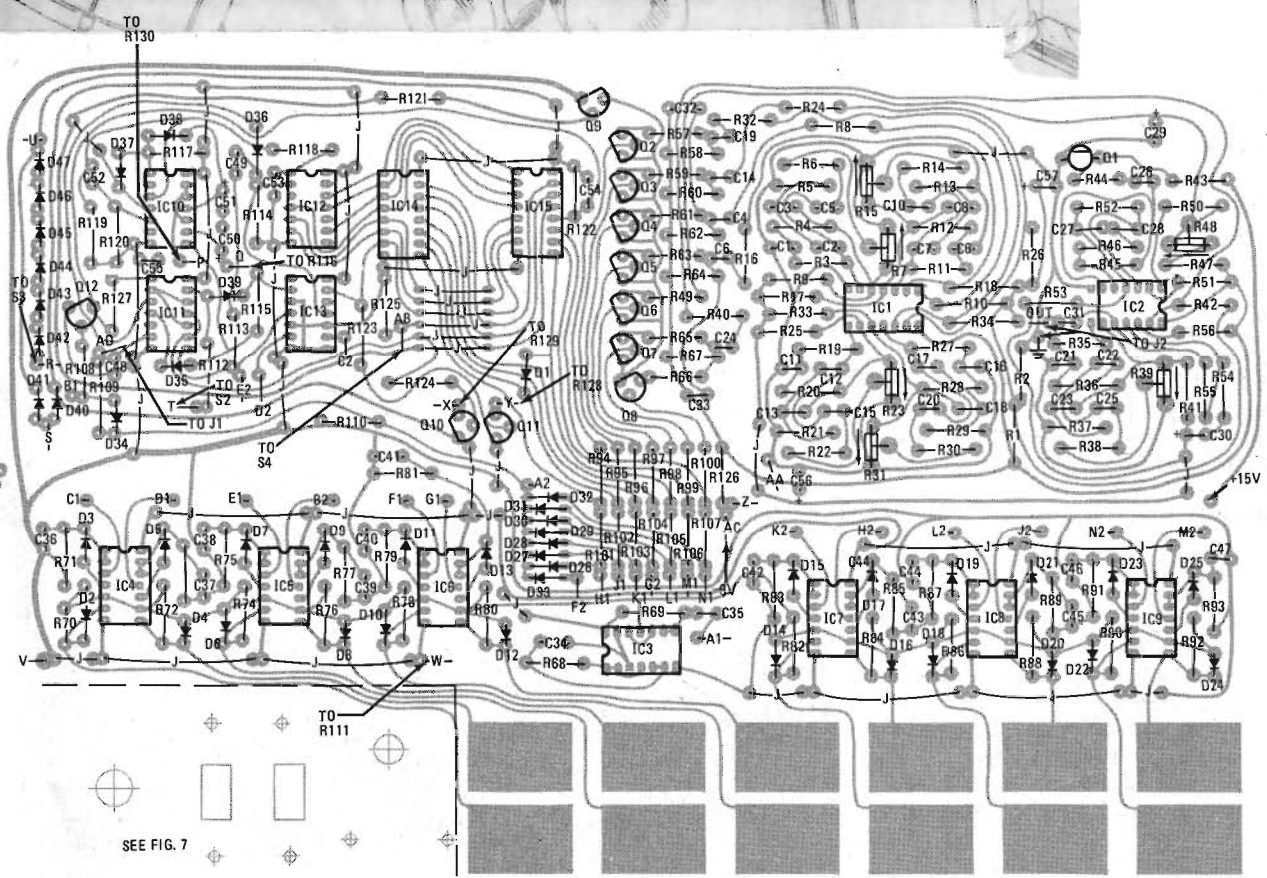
COMPONENT PLACEMENT DIAGRAM. Wiring of the PC mounted controls and switches are shown in Fig. 7.
